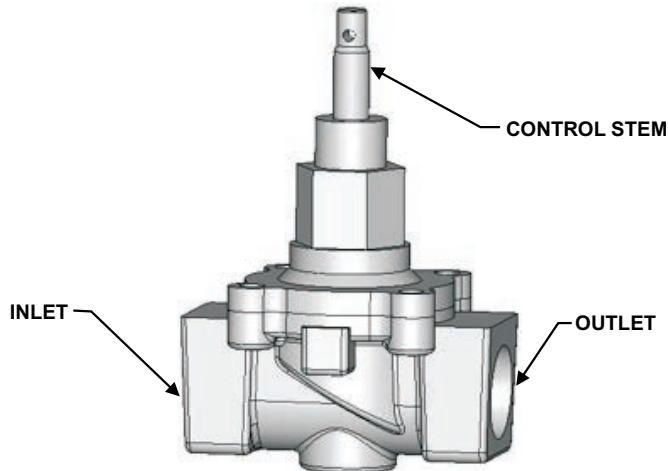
Mechanical Gas Valve, P/N 87-100001-001
